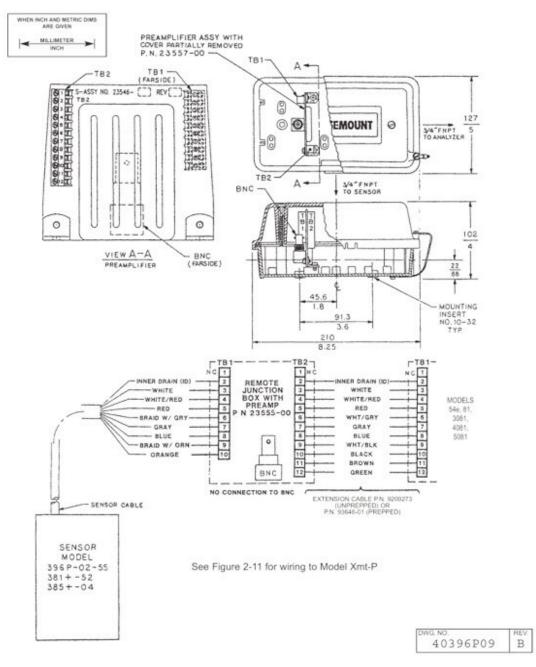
Wiring Details - Remote J-Box for Extension Cable
